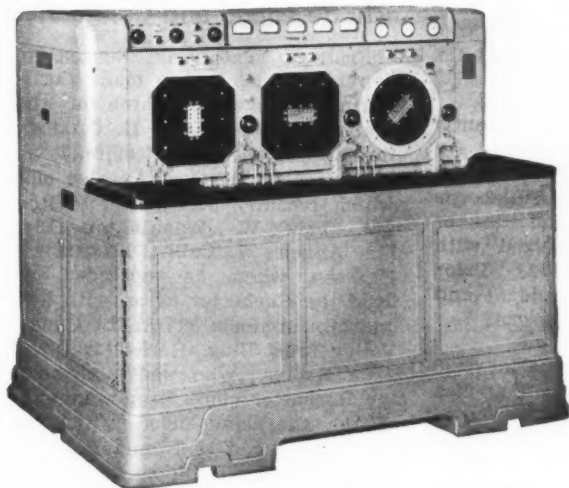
Completed TOCCO Induction Heating Machine with former base.
